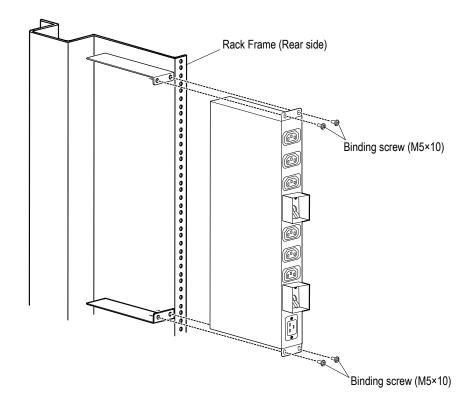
Installing the PDB (A-F6516-PDU6)
